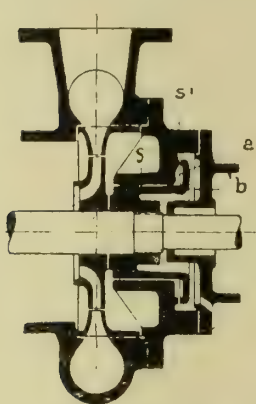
COMBINED PISTON AND DISC BALANCING DEVICE.
